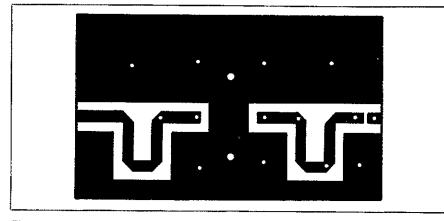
This scale drawing of the pc-board layout can be used to make a pattern for etching the board. The width of the strip-line inductors should be held very closely to 0.112 inch for best match between the transistor and 50 ohms. Material is double-sided G10 (glass-epoxy) board.
